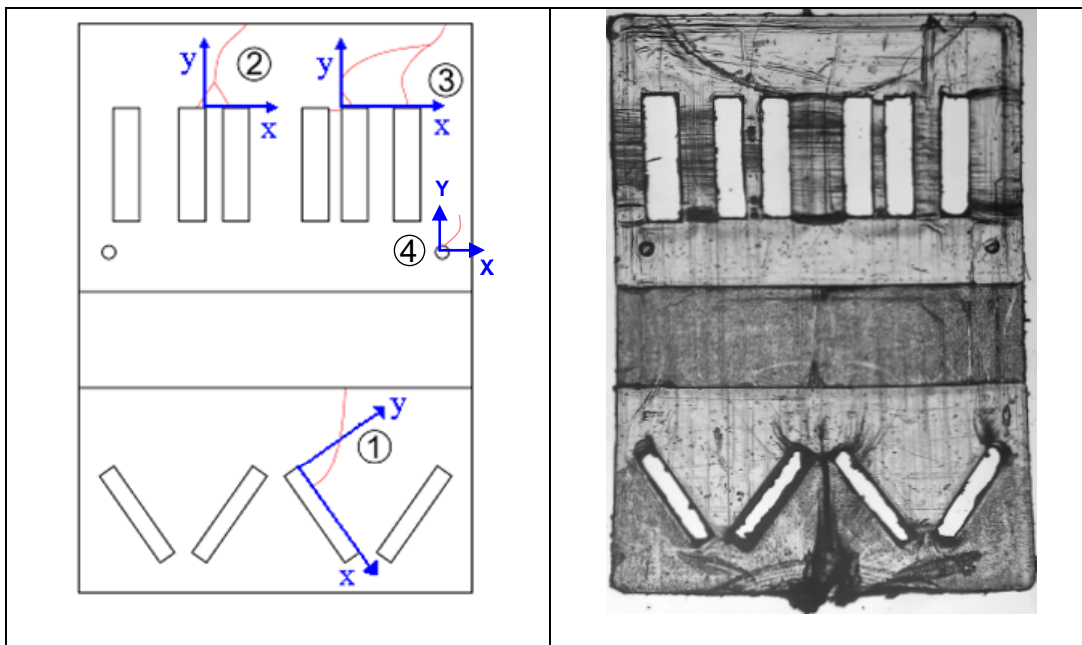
Workpiece (drawn and photo) and the four weld lines investigated.
